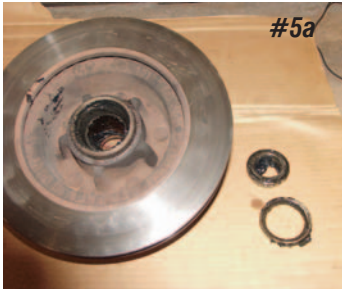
& 5b & 5c: If the inner bearing is in good shape, it can be reused in the new rotor. With the bearings removed this is a good time to clean and repack them all with good quality disc brake grease. Install the inner bearing and a NEW inner grease seal P/N 21-03. A new inner seal should always be used when removing the inner bearing.
